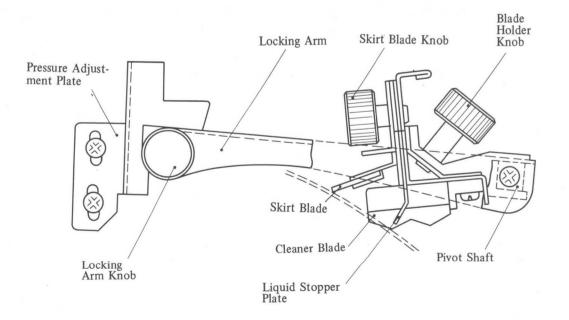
Drum Cleaner Assembly Main Components (from Copier Front)
